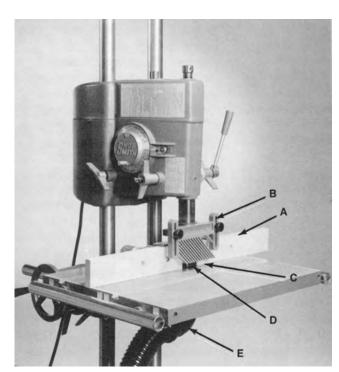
The accessories used for fence shaping are: (A) shaper fence, (B) feather board guard, (C) shaper insert, (D) shaper arbor and cutter and (E) dust chute.
